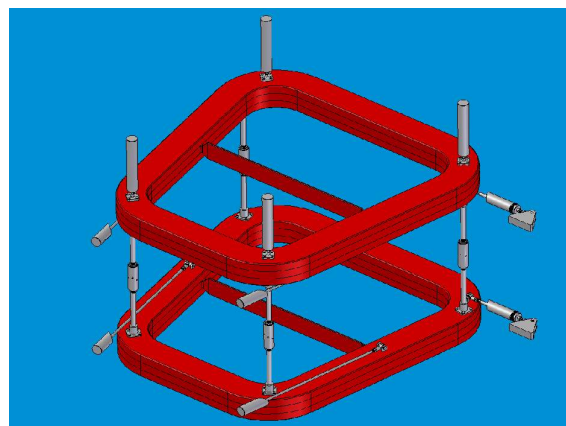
Cold mass supports, bottom coil suspension rods and straight section connections.
